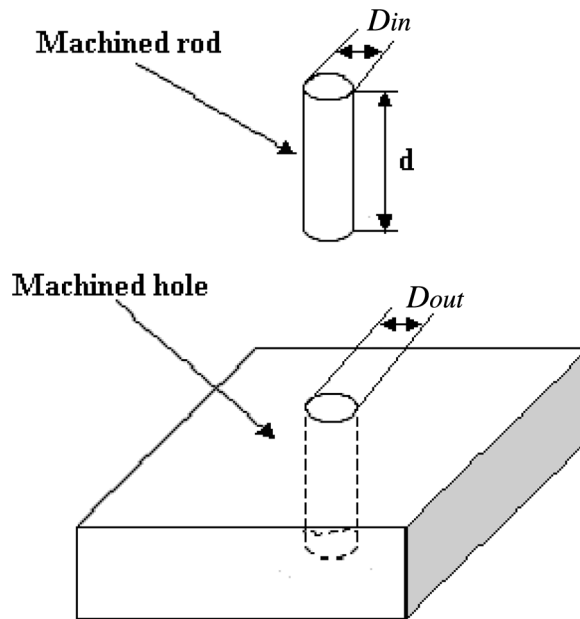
Illustration of the hole and rod machined by rotary ultrasonic machining.
